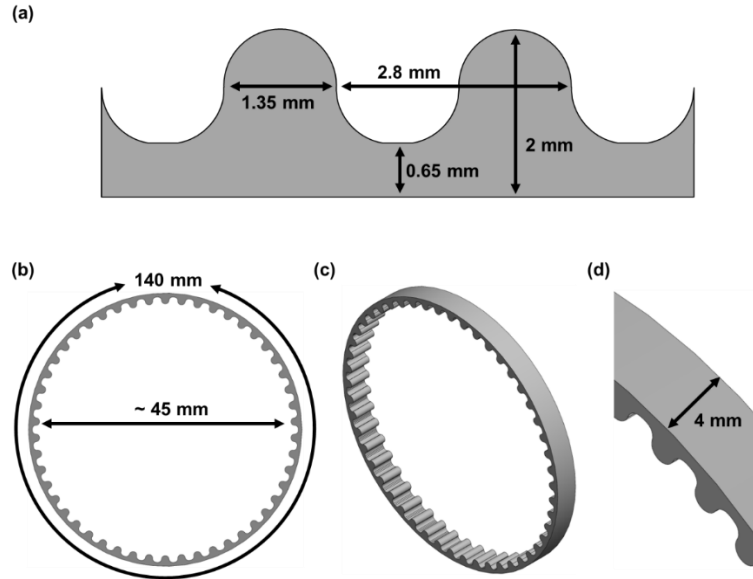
(a) Dimensions of the teeth, thickness, and tooth separation, (b) front view of the toothed belt, (c) angled view of the toothed belt, and (d) dimension of the belt width.
